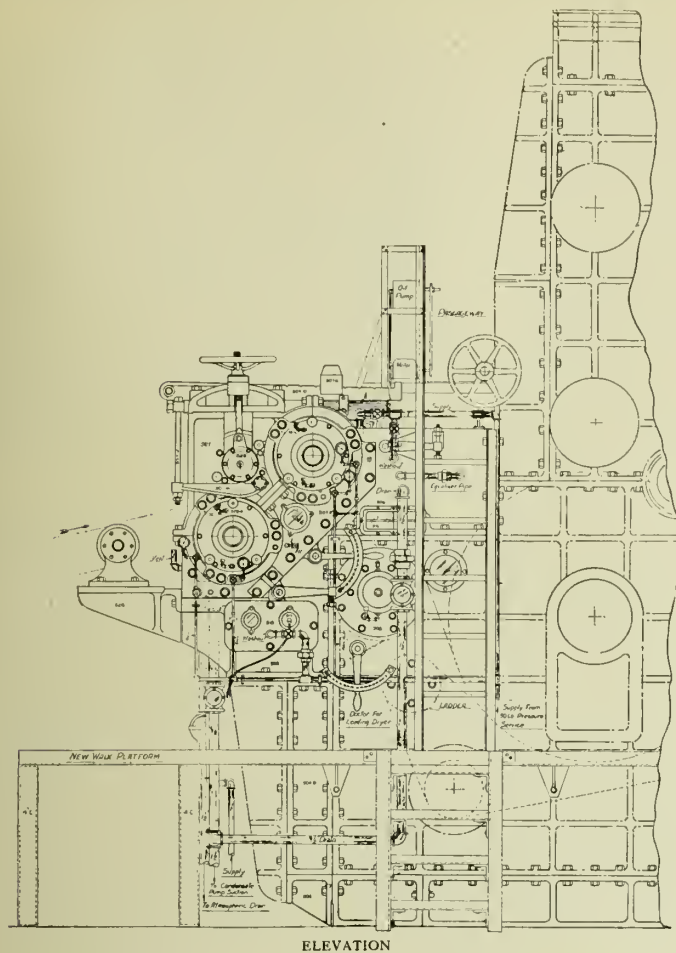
Vacuum Dryer Type 20-60-152, Elevation of Ingoing Seal.
